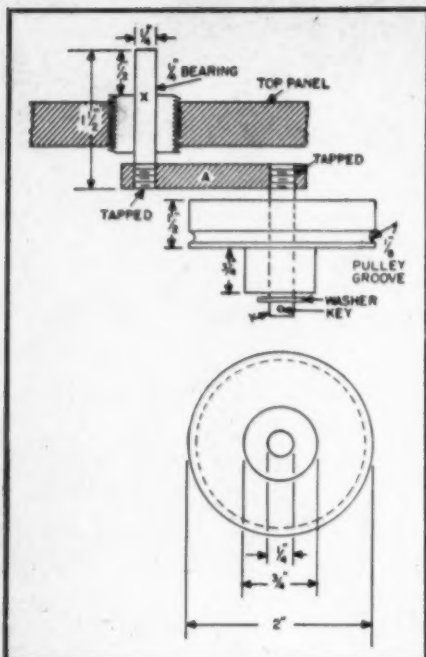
Mechanical details show construction of rewind assembly. A pointer type knob fits over shaft "X" shown in diagram.
